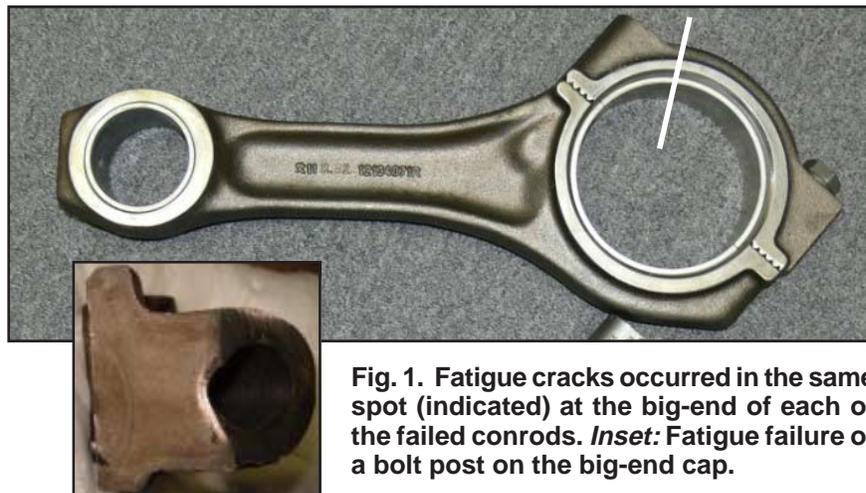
Fatigue cracks occurred in the same spot (indicated) at the big-end of each of the failed conrods. Inset: Fatigue failure of a bolt post on the big-end cap.
